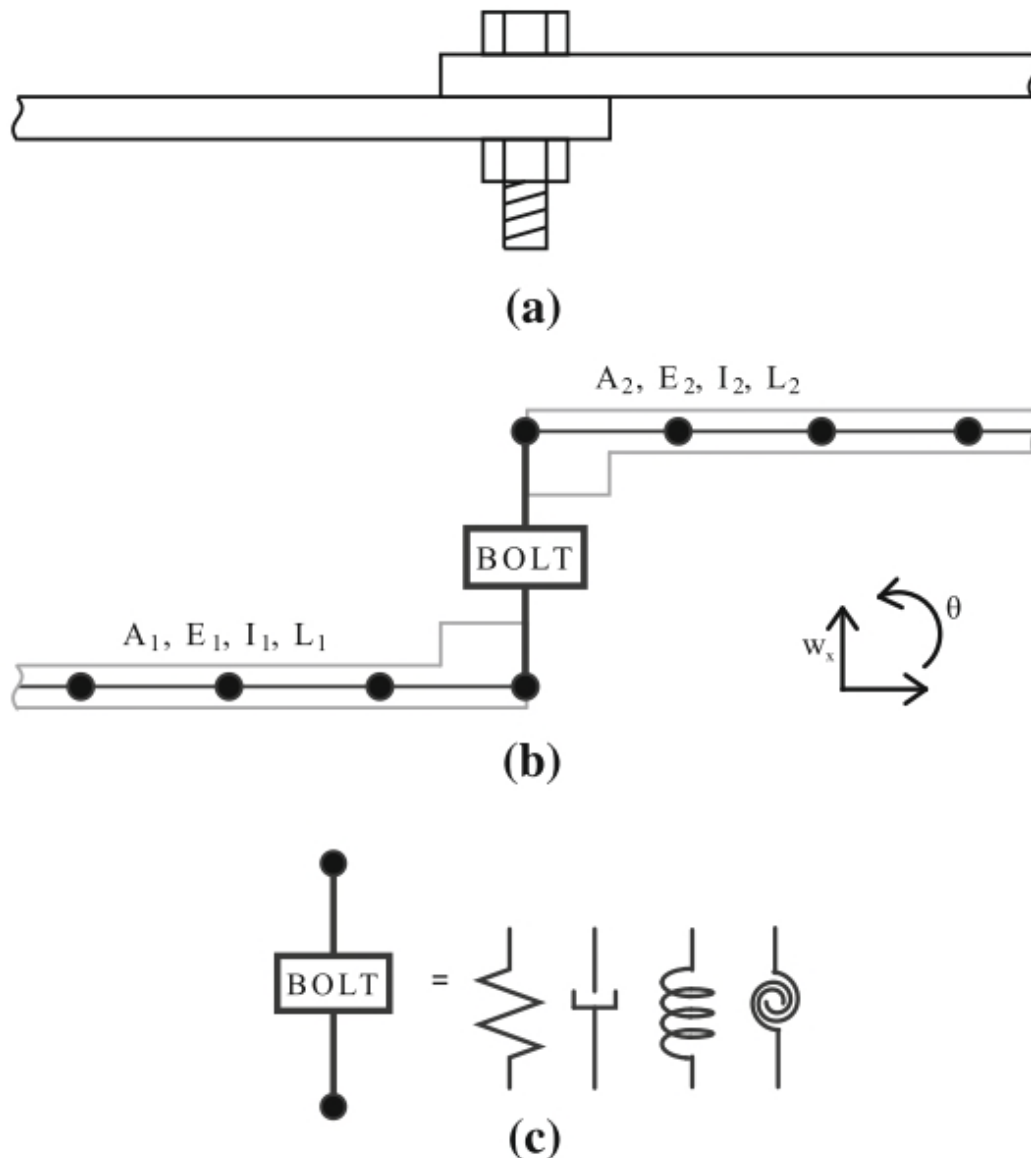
a) lap joint investigated by Meyer and Adams (2015) b) Custom beam theory model of the bolted lap joint c) illustration of the element inside the bolt element, which is a classic Euler–Bernoulli element with a quadratic stiffness and two
